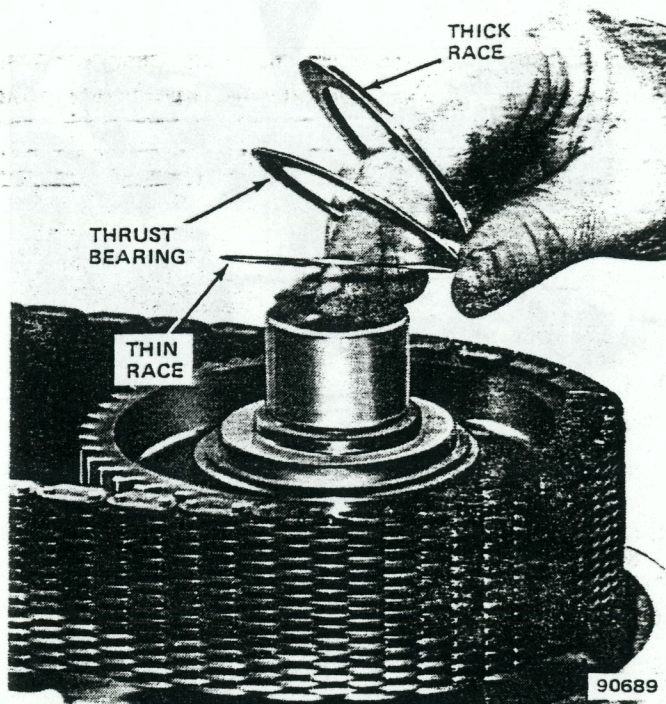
D-49 Front Output Shaft Rear Thrust Bearing Assembly Removal/Installation
